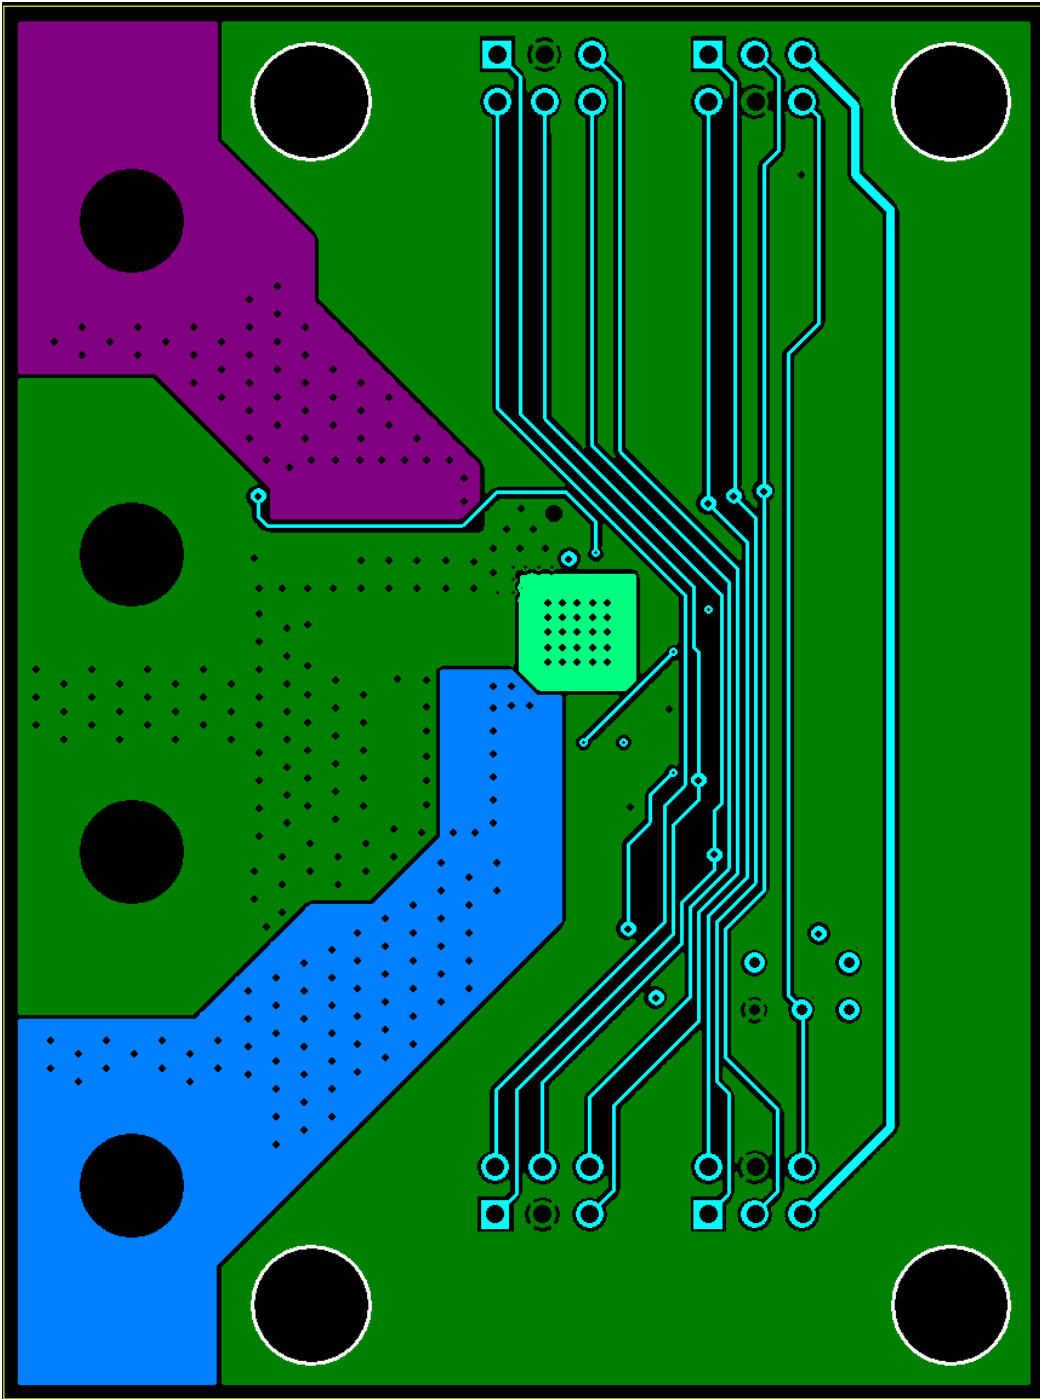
PCB - INNER LAYER 2 (VIEWED FROM TOP)
